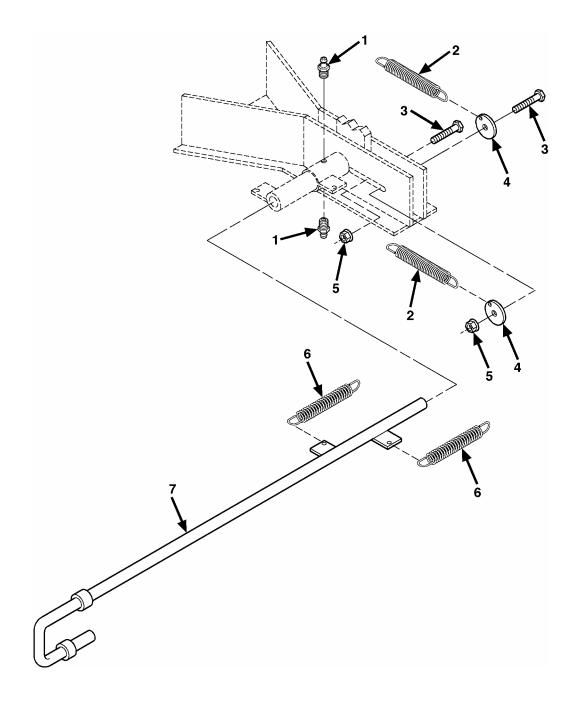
GOOSENECK LOCKING ASSEMBLY
